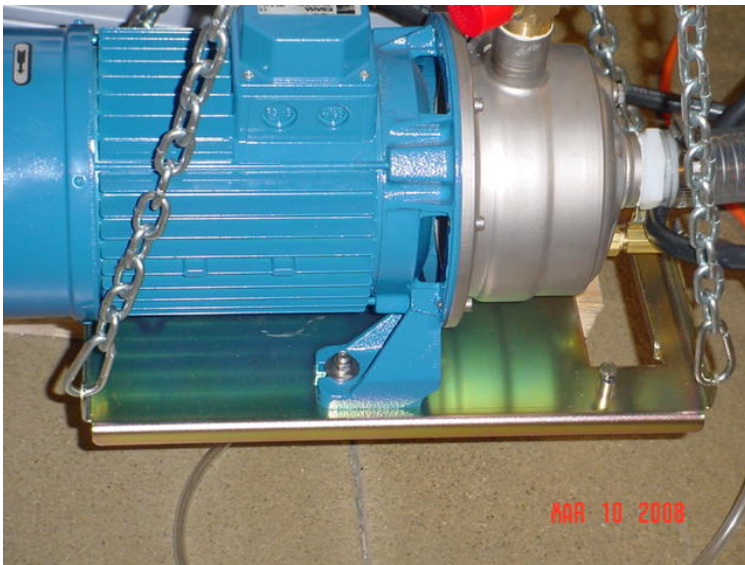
Lifting the Pump Assembly (EBARA pump pictured)
